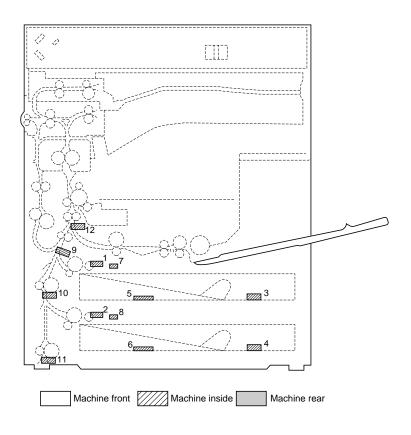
Copier (switches and sensors in the paper feed and conveying system)
